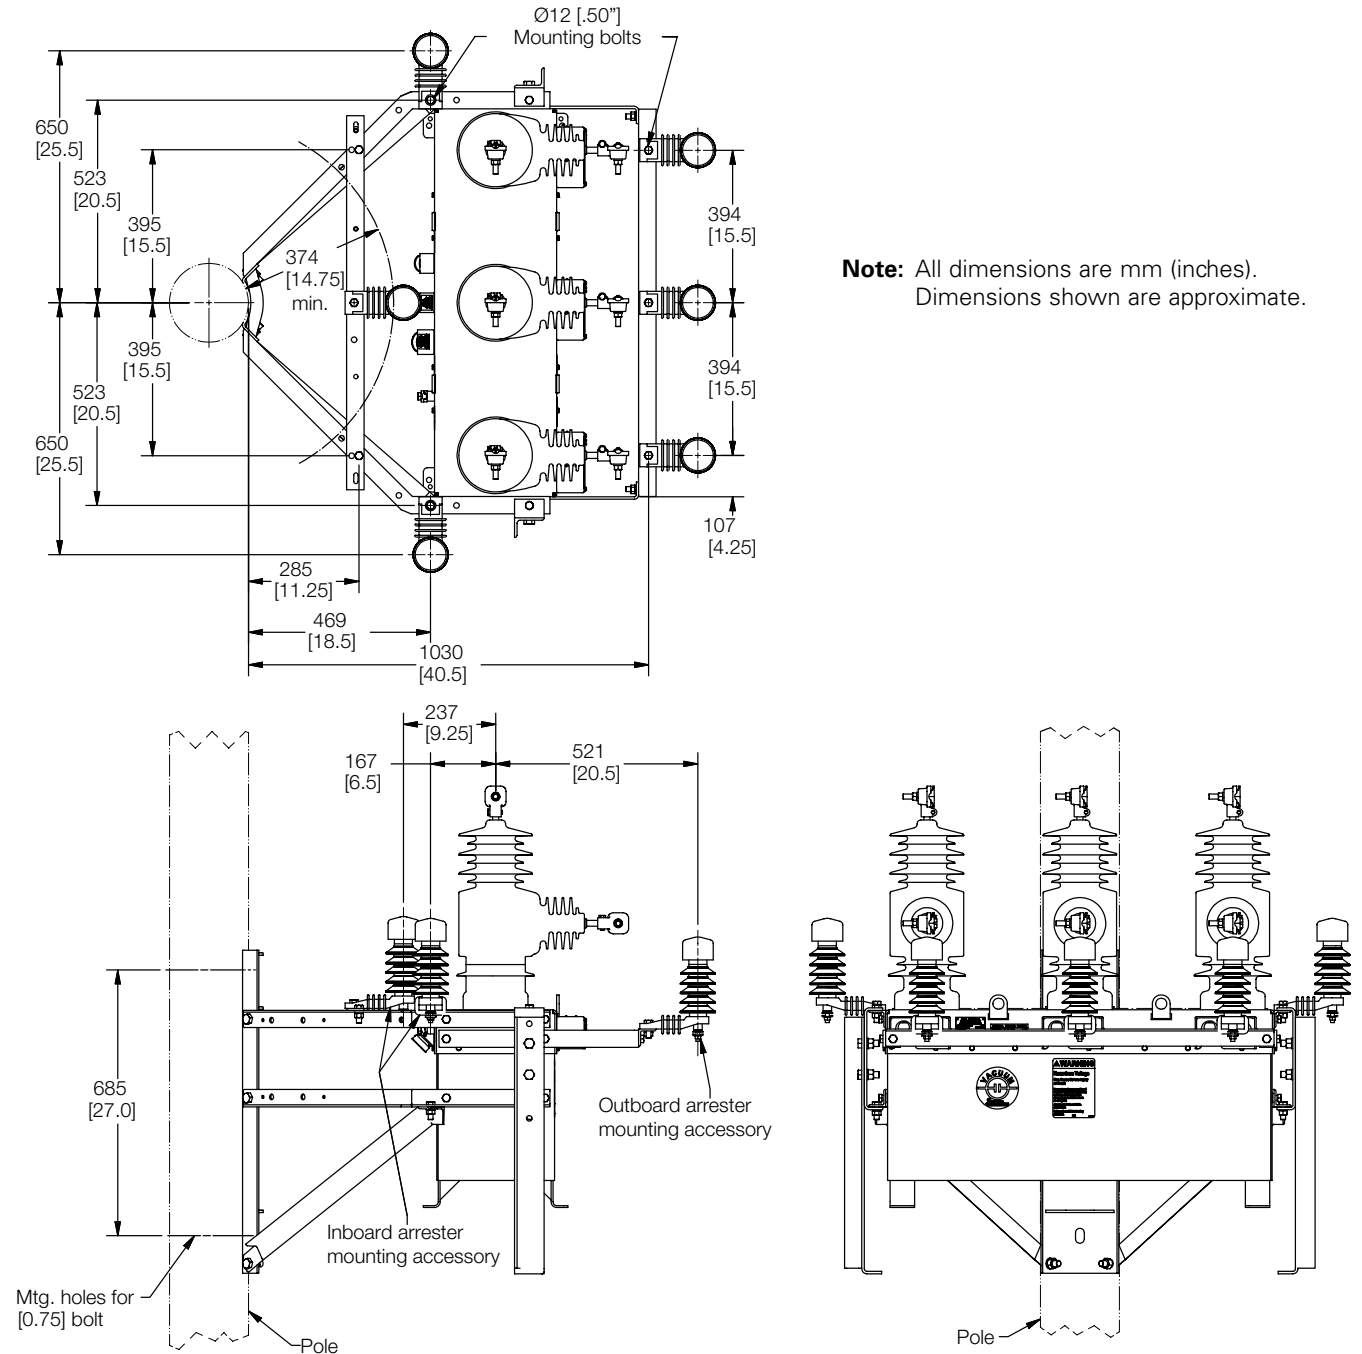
Dimensions of NOVA STS recloser with site-ready pole-mounting hanger and arrester-mounting bracket accessories.
